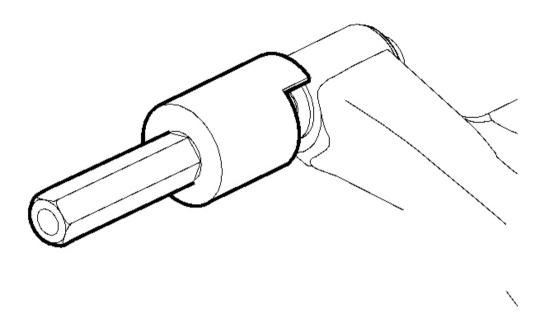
Front Control Arm Bushing Courtesy of GENERAL MOTORS CORP.
